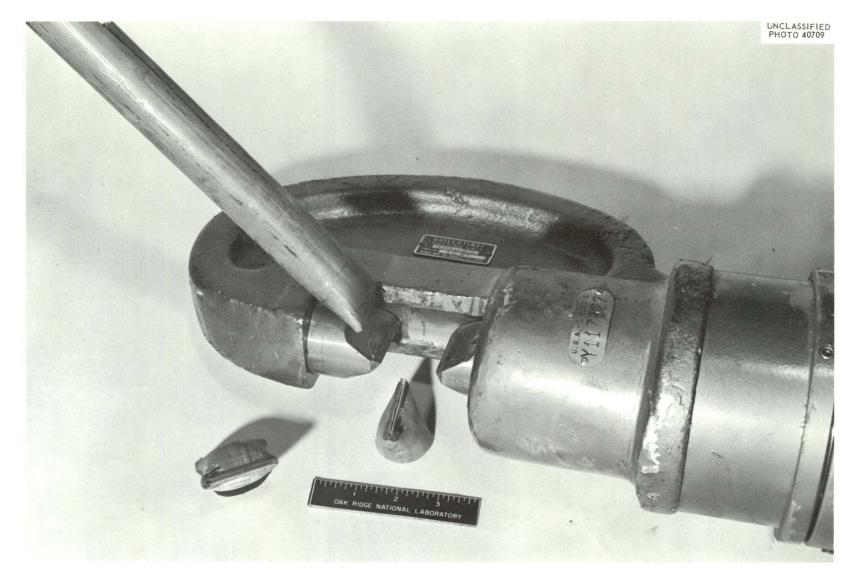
A Piece of 3/4-in. Pipe Severed in an MC-65 Shear Showing the Type of Closure Produced.
